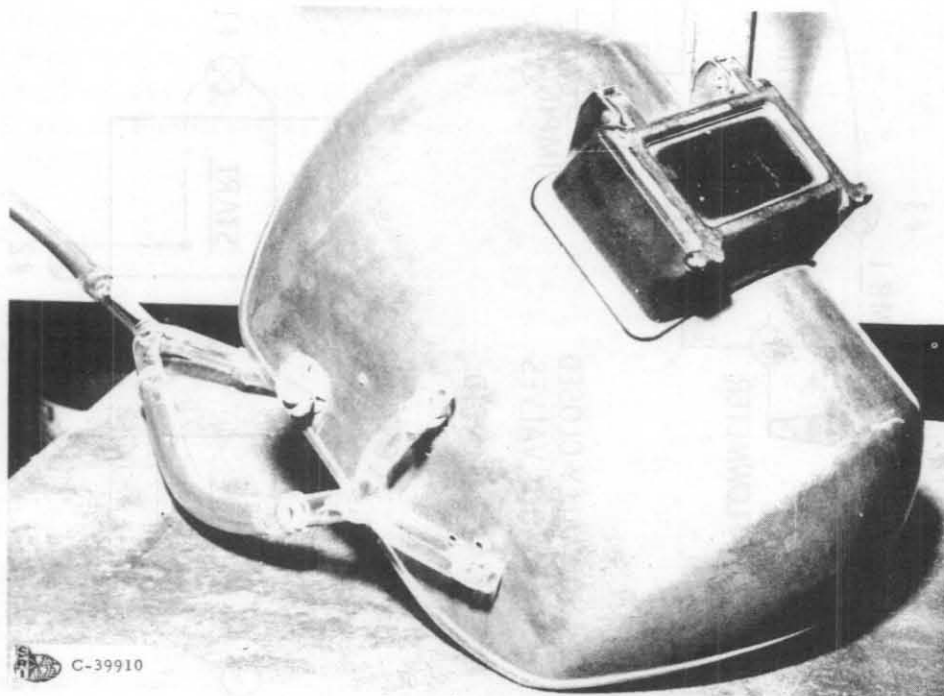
Welding Helmet with Fume Sampling Ports
